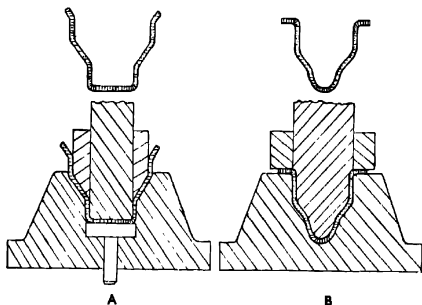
Third and final draws to produce flanged shell, A and B.
